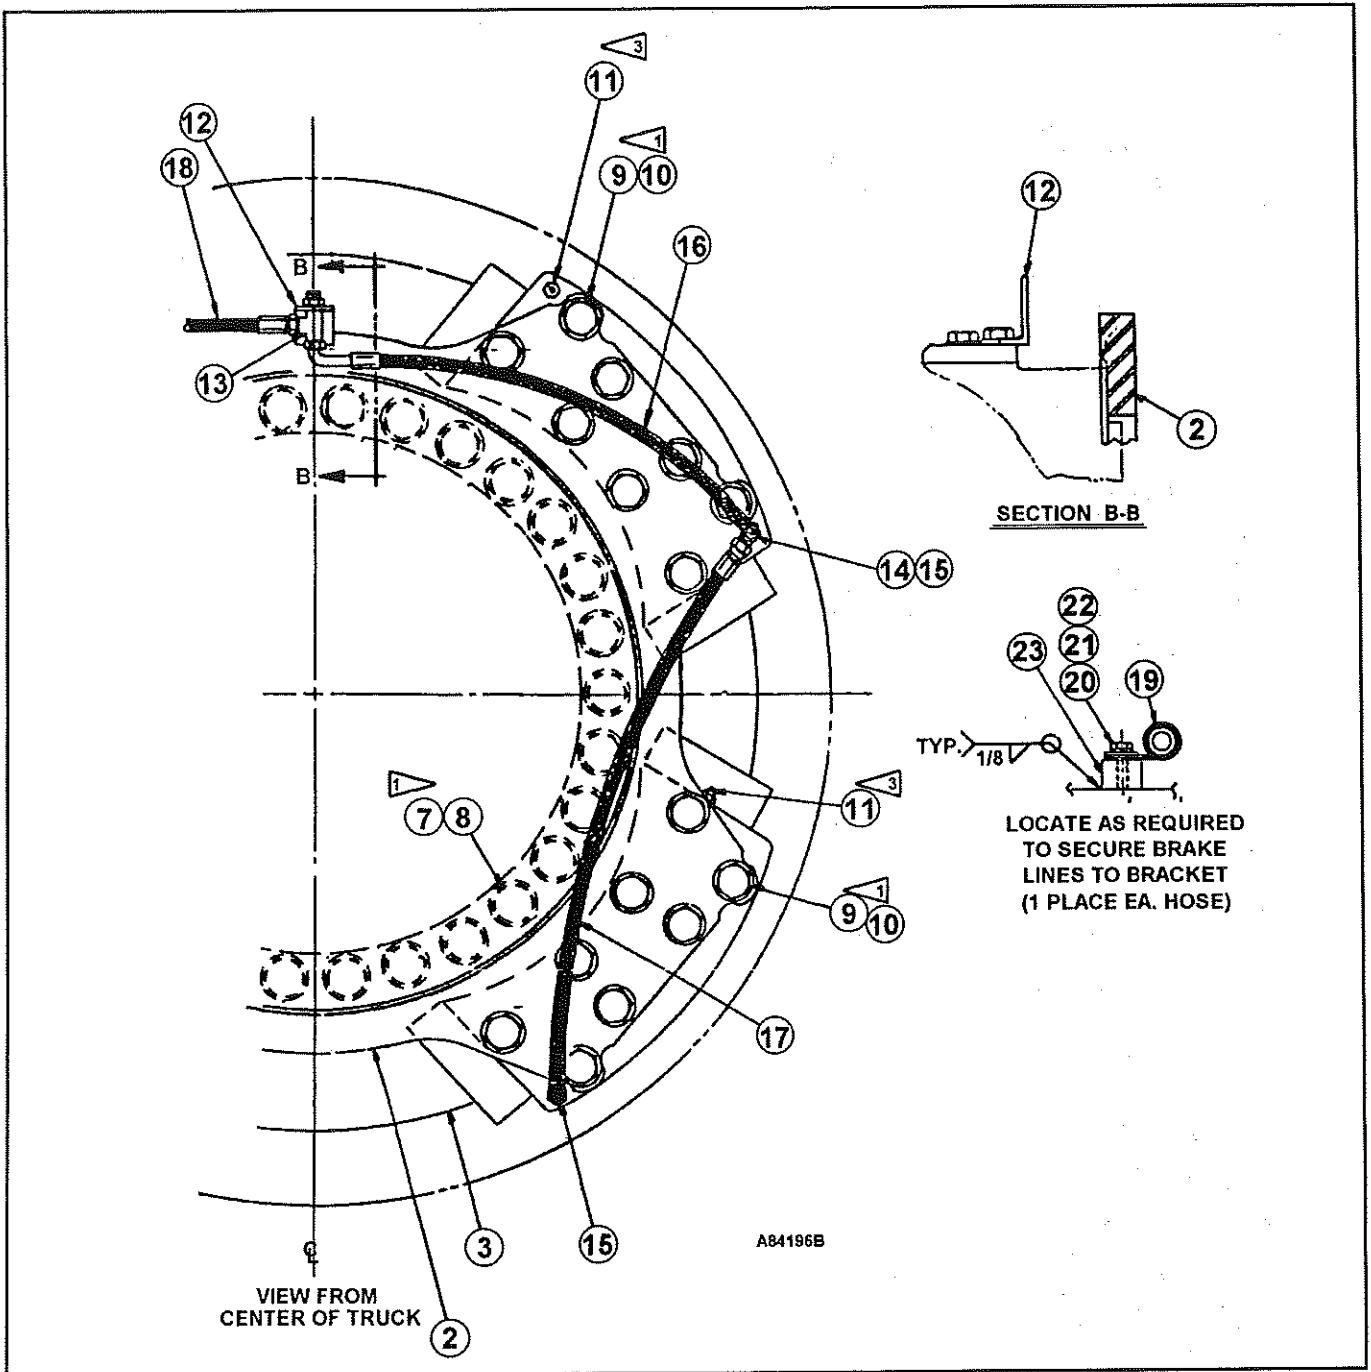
QUAD FRONT CALIPER INSTALLATION - MT 4400, 5500 (SHEET 2 OF 2)
